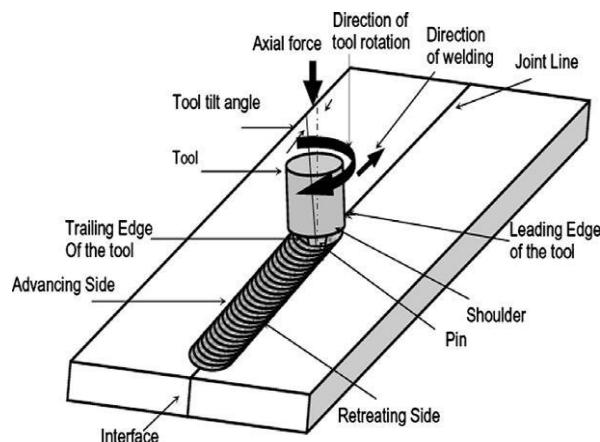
Diagram of a Friction Stir Welding Process
